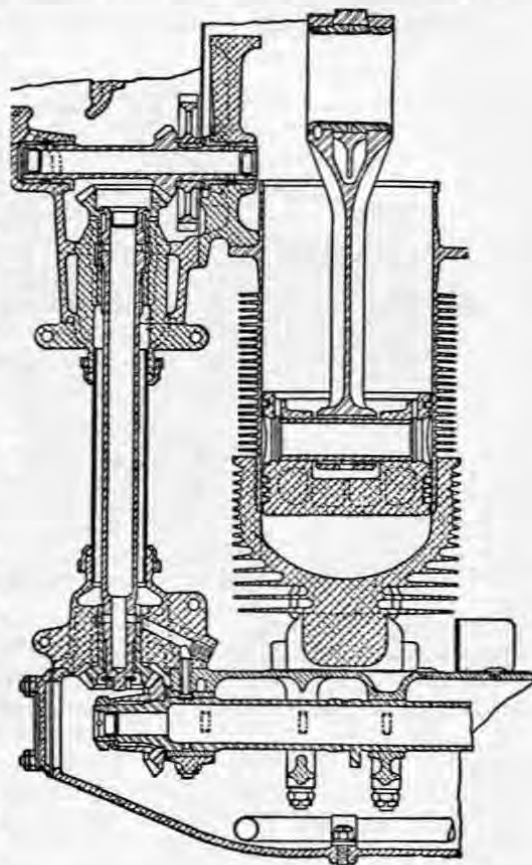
Camshaft drive of the Ranger aircraft engine.
